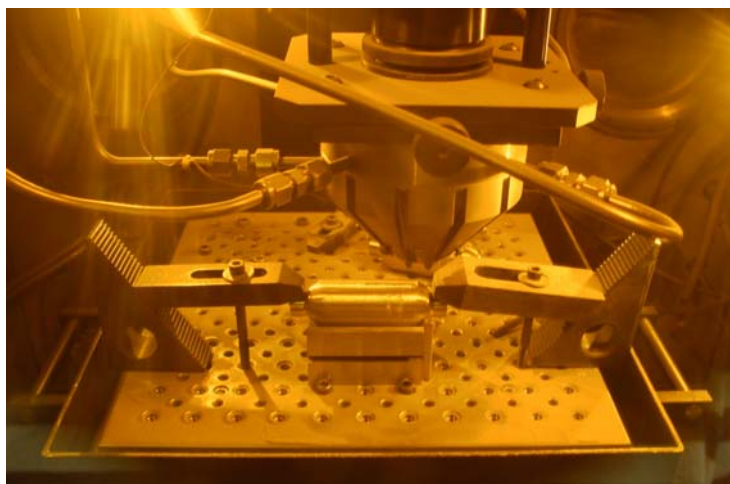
Sample Gas Bottle Gouge Being Repaired in LENS Machine
